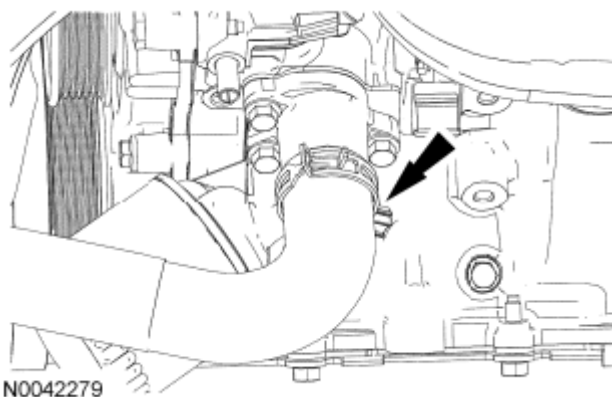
Locating Lower Radiator Hose And Oil Filter Adapter
